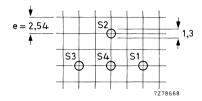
Hole pattern for mounting on a printed-wiring board (solder side).
